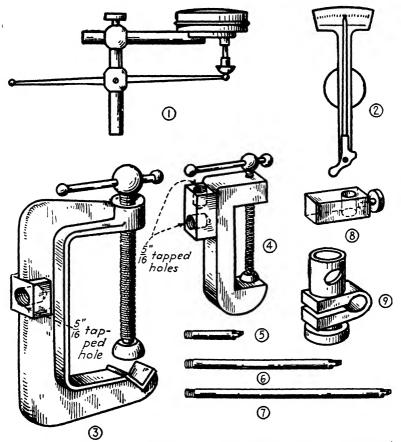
Dial and test indicator clamps and extension rods. (Courtesy of Power.)
